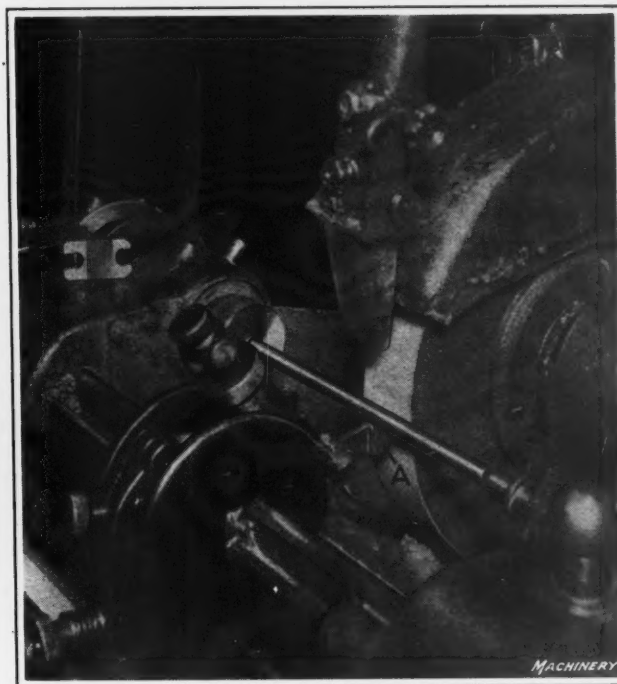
Cylindrical Grinding Operation on Long Thin Shafts where Accuracy is Essential
